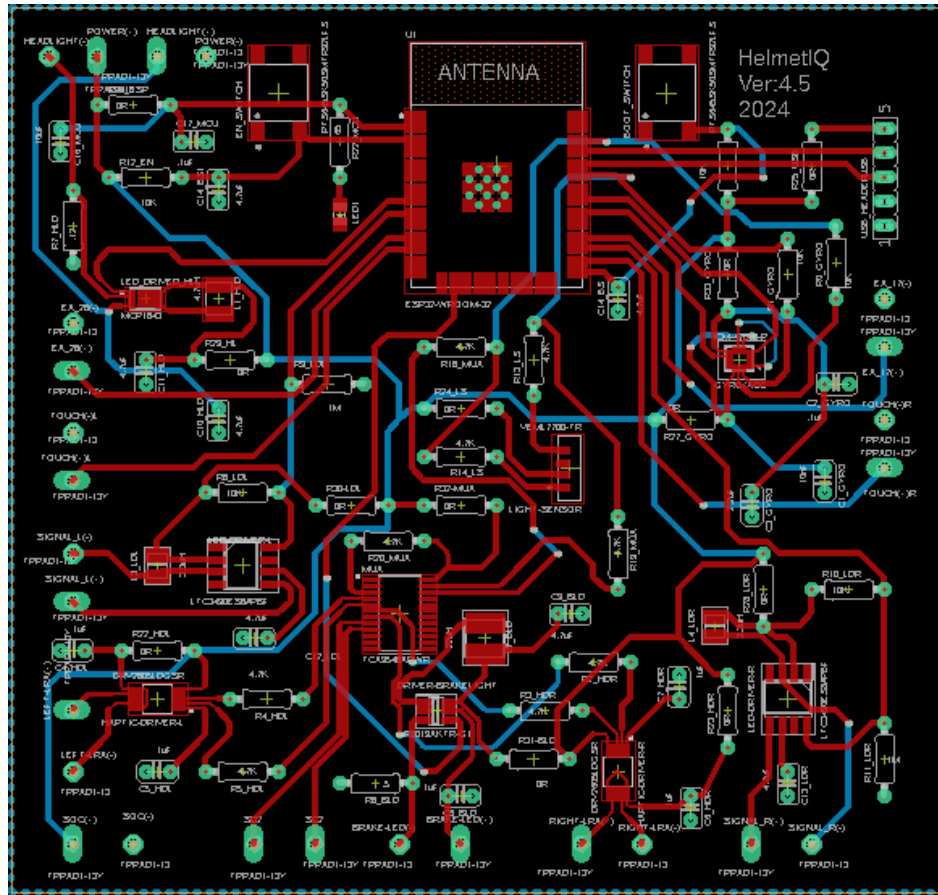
Final HelmetIQ PCB Ver.4.5
